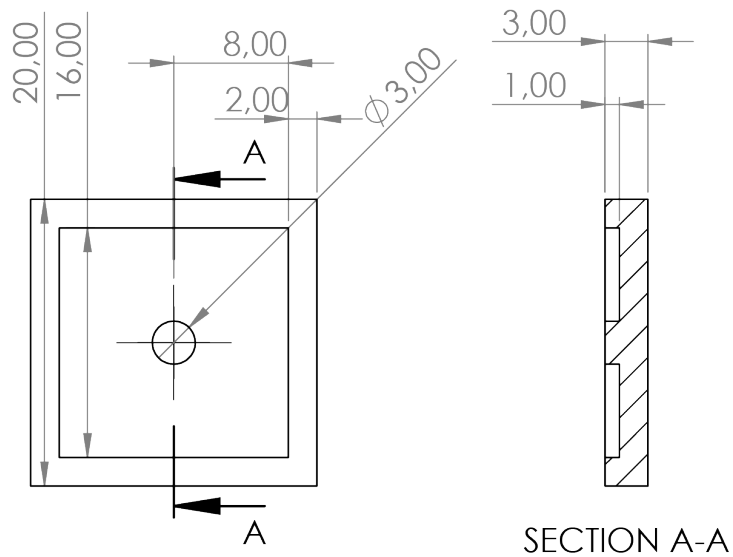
Drawing of the square mould used for direct POMaC moulding in a 3D printed mould. Dimensions are in millimeters (mm).
